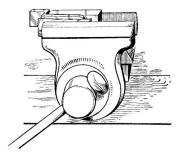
Showing Packing Used When Holding Cock in Vice
